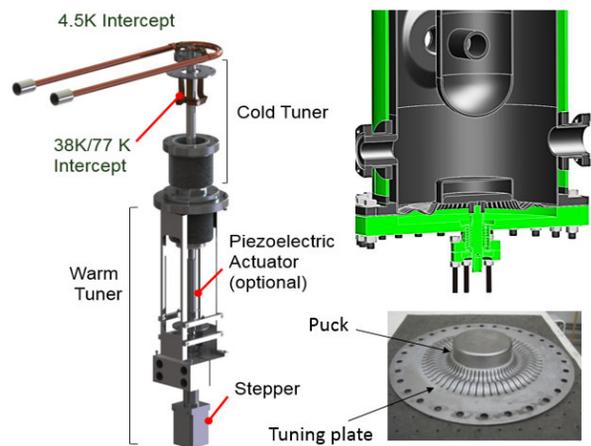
QWR Tuner, tuning plate driven left, tuning on cavity bottom flange(right upper), Tuning plated welded puck (right bottom) .
